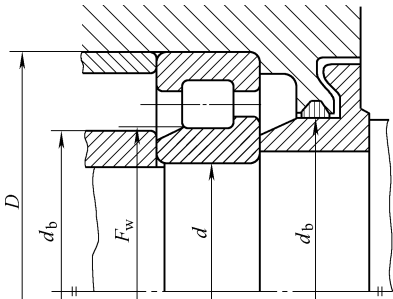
26 NJ type cylindrical roller bearing installation dimension
